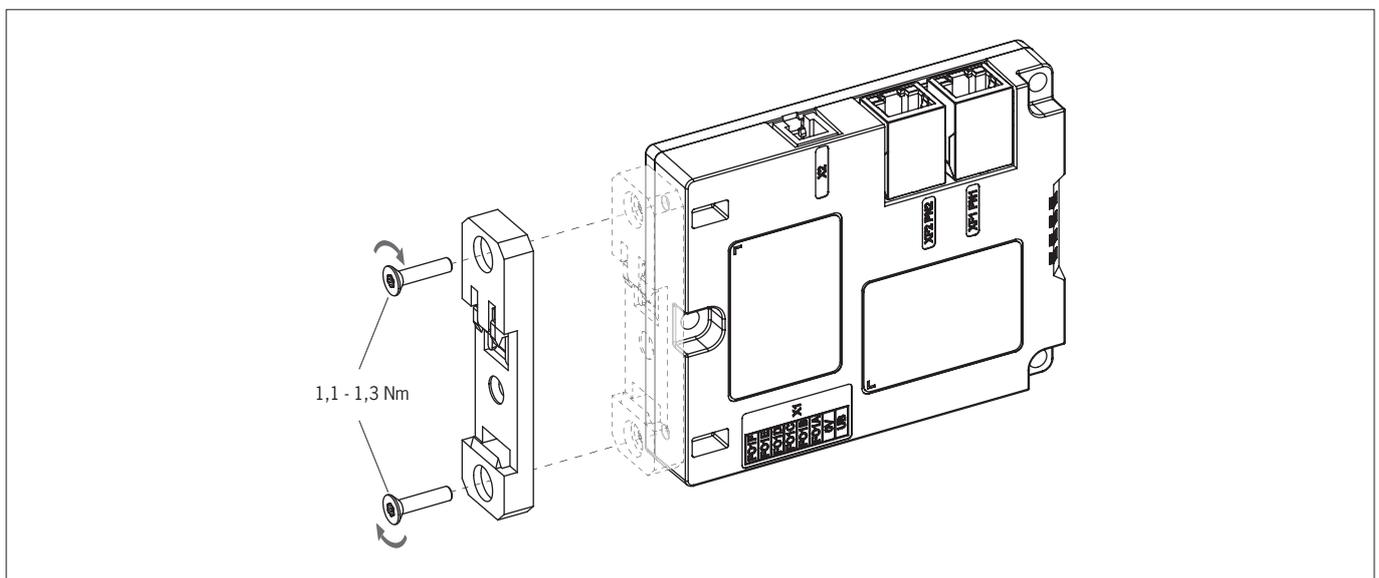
Evaluation unit with mounting rail adapter for control cabinet mounting
